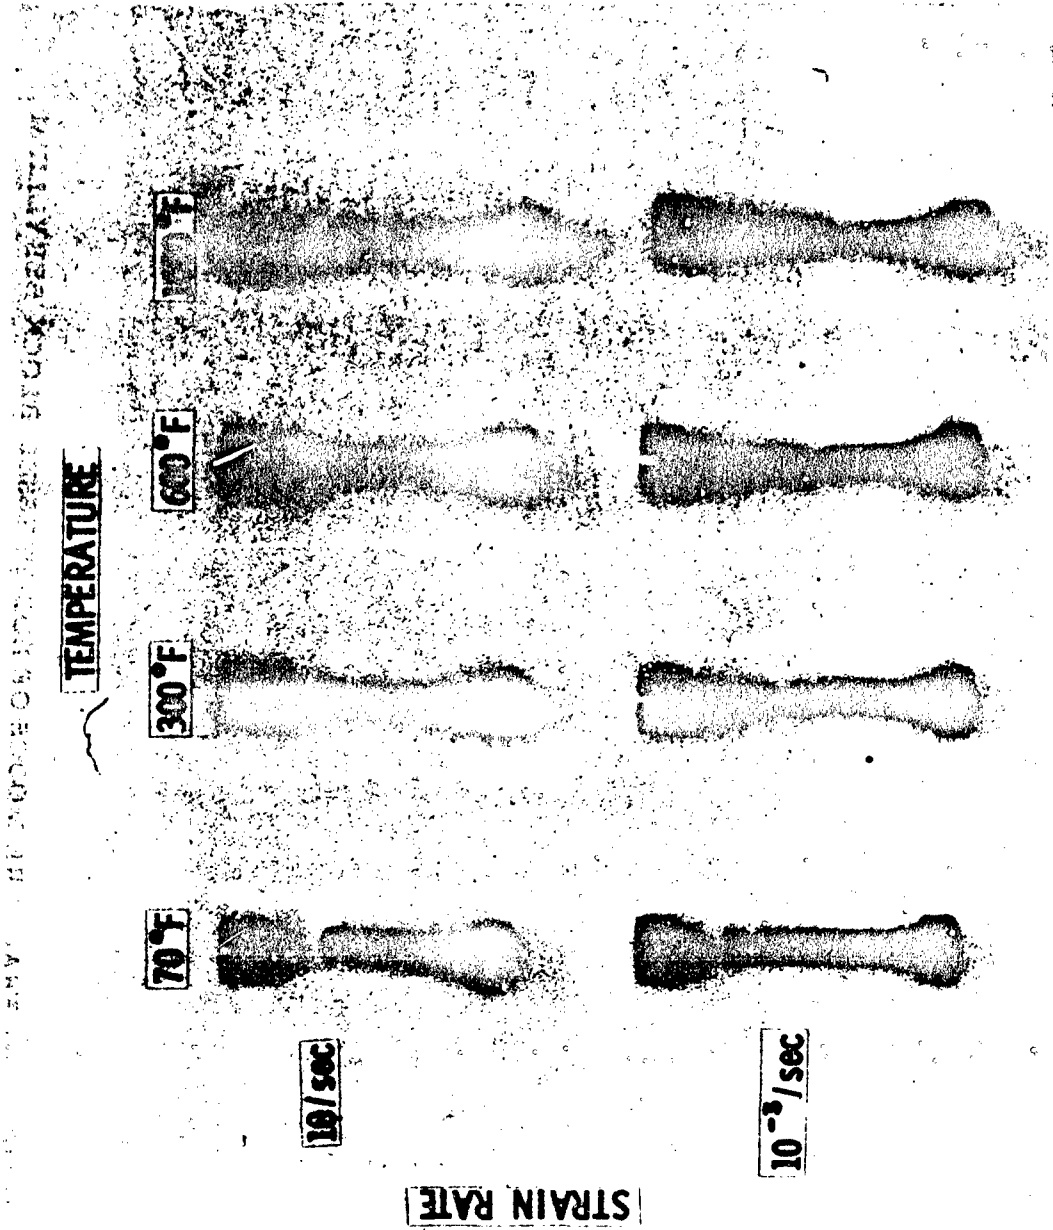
FRACTURE MODES OF EXTRUDED BERYLLIUM
